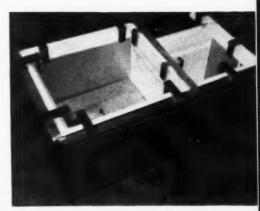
Formed refrigerator cabinet is placed in holding fixture and polyure-thane foam is applied to joints.
